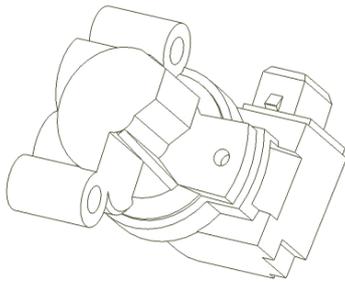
idle executor with stepper motor Fig.4-182 idle executor with stepper motor circuit diagram
